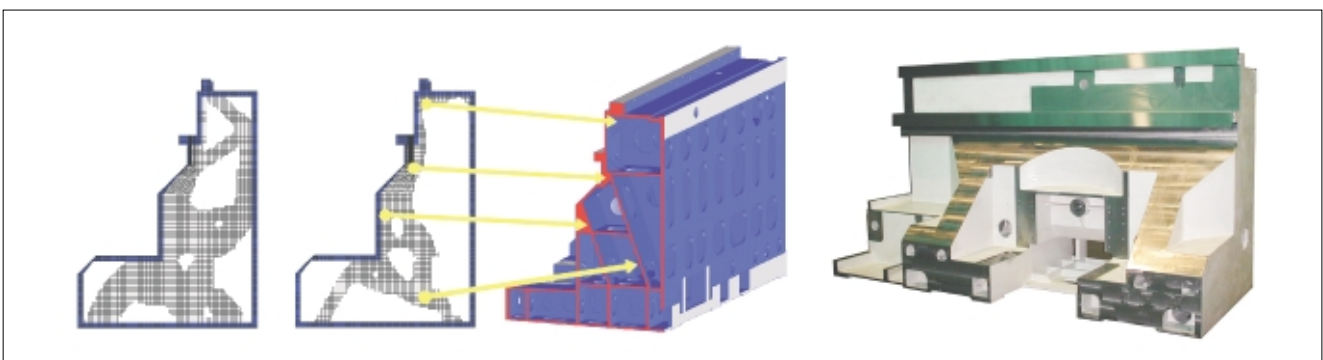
Machine base of a vertical lathe (left to right: Proposed designs, implemented 3D-CAD construction, ready-to-install machined component; Material: EN-GJL-250, Dimensions: 3,600 × 1,950 × 1,430 mm, weight: 7,400 kg)
